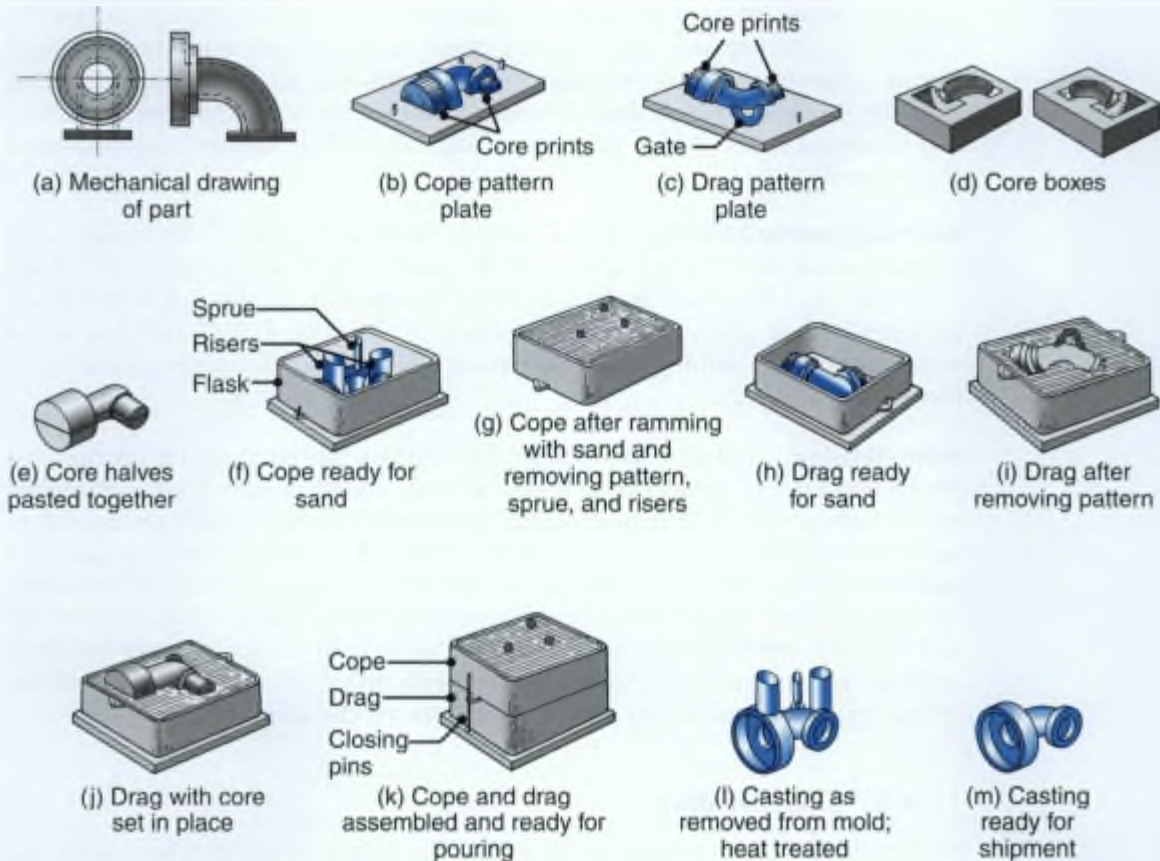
Schematic illustration of the sequence of operations for sand casting. (a) A mechanical drawing of the part is used to generate a design for the pattern. Considerations such as part shrinkage and draft must be built into the drawing. (b) and (c) Patterns have been mounted on plates equipped with pins for alignment; note the presence of core prints designed to hold the core in place. (d) and (e) Core boxes produce core halves, which are pasted together; the cores will be used to produce the hollow area of the part shown in (a). (f) The cope half of the mold is assembled by securing the cope pattern plate to the flask with aligning pins and attaching inserts to form the sprue and risers. (g) The flask is rammed with sand, and the plate and inserts are removed. (h) The drag half is produced in a similar manner with the pattern inserted; a bottom board is placed below the drag and aligned with pins. (i) The pattern, flask, and bottom board are inverted, and the pattern is withdrawn, leaving the appropriate imprint. (j) The core is set in place within the drag cavity. (k) The mold is closed by placing the cope on top of the drag and securing the assembly with pins; the flasks are then subjected to pressure to counteract buoyant forces in the liquid, which might lift the cope. (l) After the metal solidifies, the casting is removed from the mold. (m) The sprue and risers are cut off and recycled, and the casting is cleaned, inspected, and heat treated (when necessary). *Source:* Courtesy of Steel Founders' Society of America.
